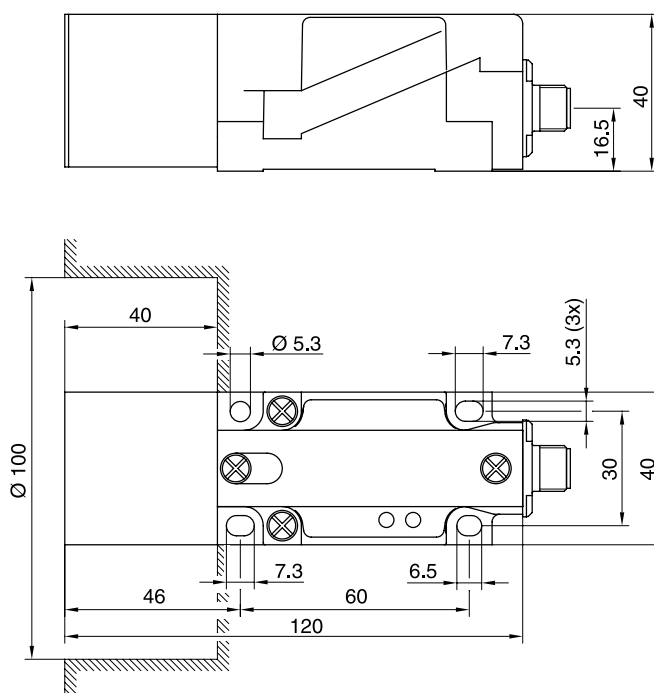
BIS L-400-043-001-02-S115 processor dimensions
